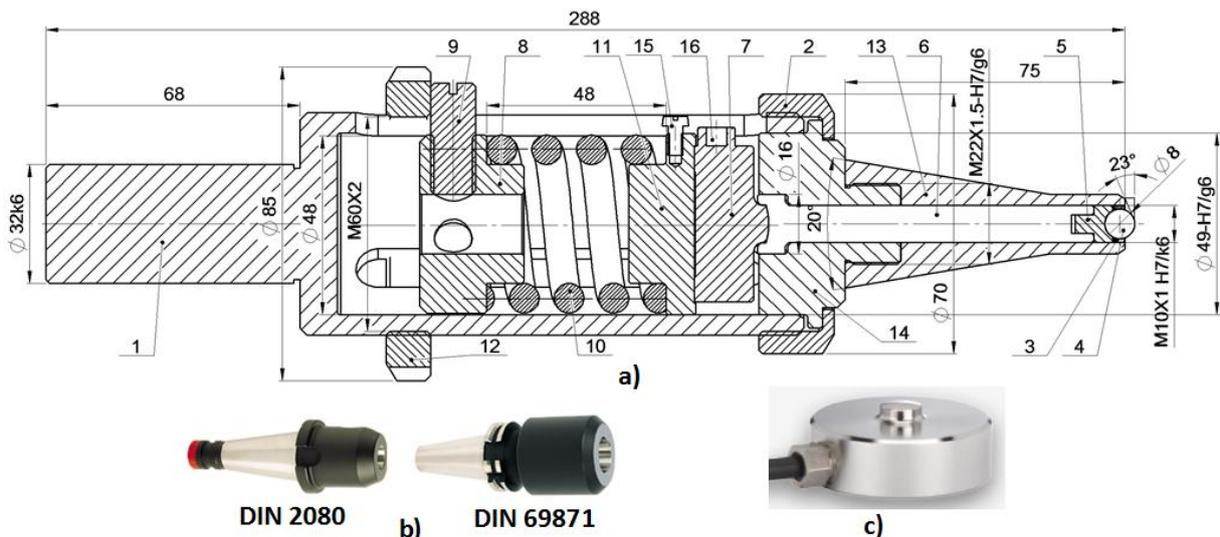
a) Assembly of the redesigned tool for SPD; b) Tool holders type ISO 40, DIN 2080 and DIN 69871; c) Miniature force sensor type FCM (SIKA Dr. Siebert & Kühn GmbH & Co).
